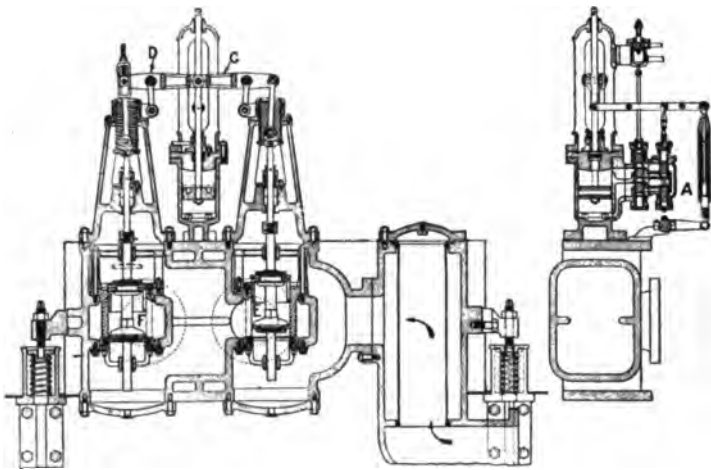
SEC. 3.—Valve gear with oil relay, Westinghouse turbine.
